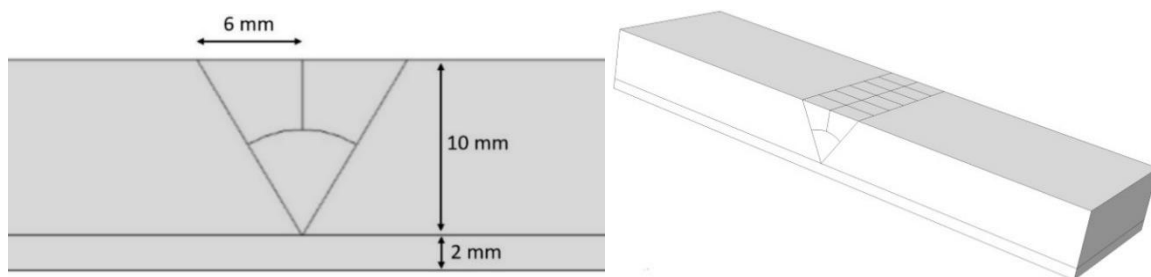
Single V-groove weld plate geometry (a) front view, (b) 3D view
